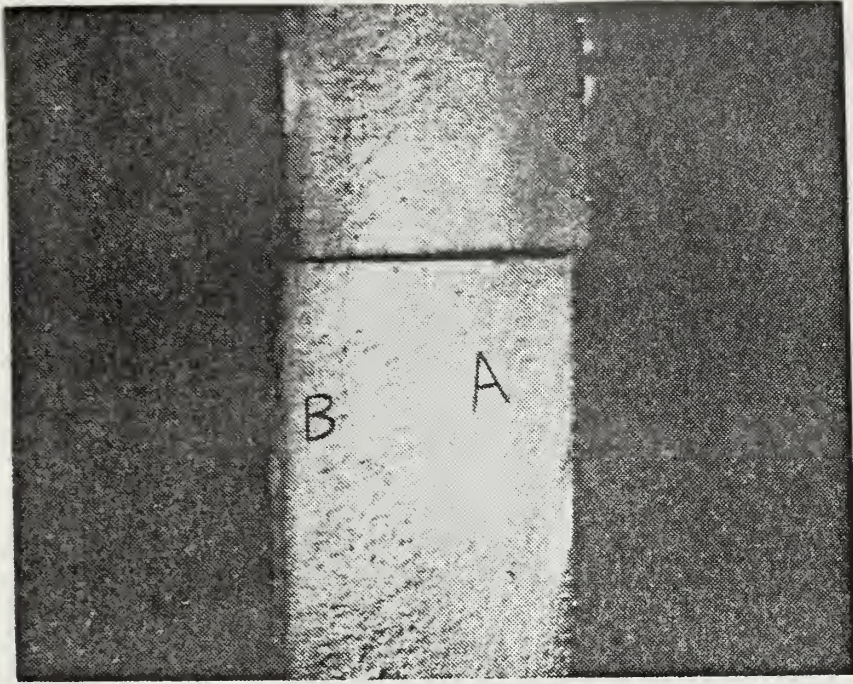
Fatigue fracture surfaces of AR-3-7, fractured after 161,600 cycles at 60 ksi, showing a crescent-shaped fatigue zone with one crack nucleus. X10.
